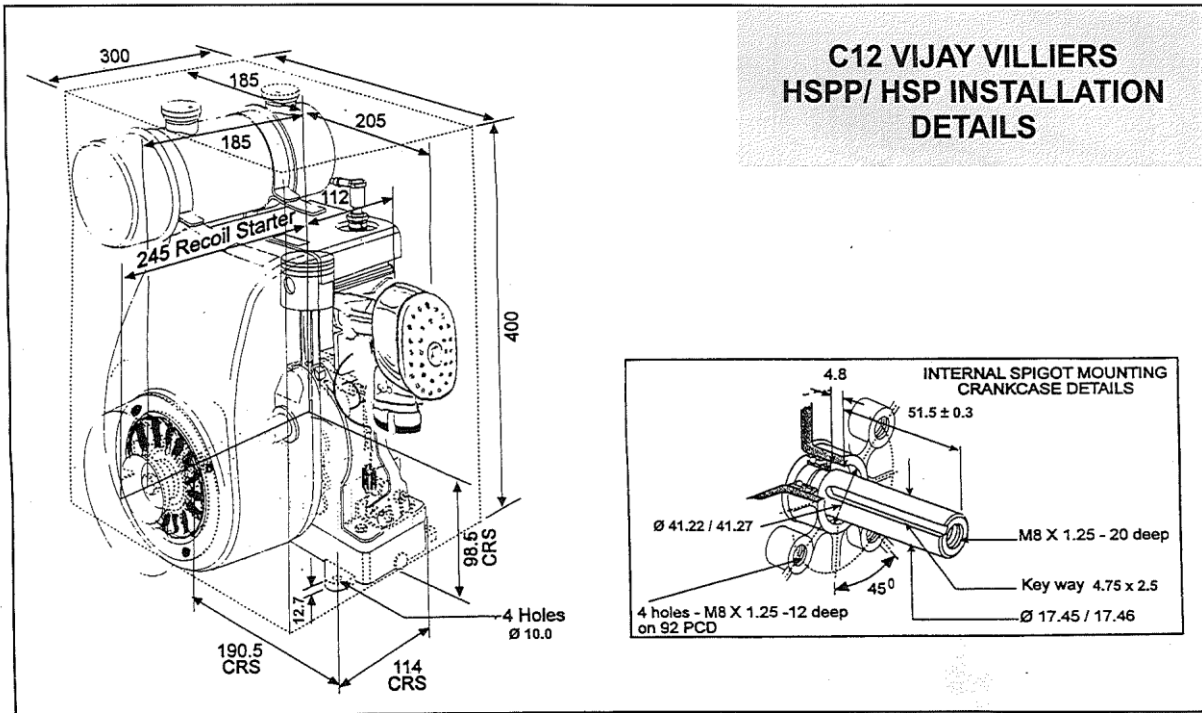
Drawing of Vijay Villiers C12 engine used in the prototype. [96]
